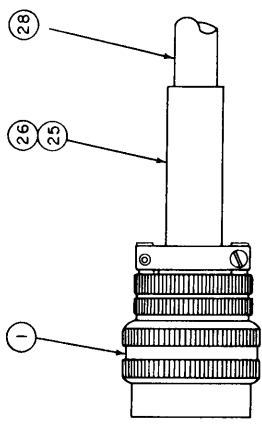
Cable Assembly, CA-705-1, Fabrication
